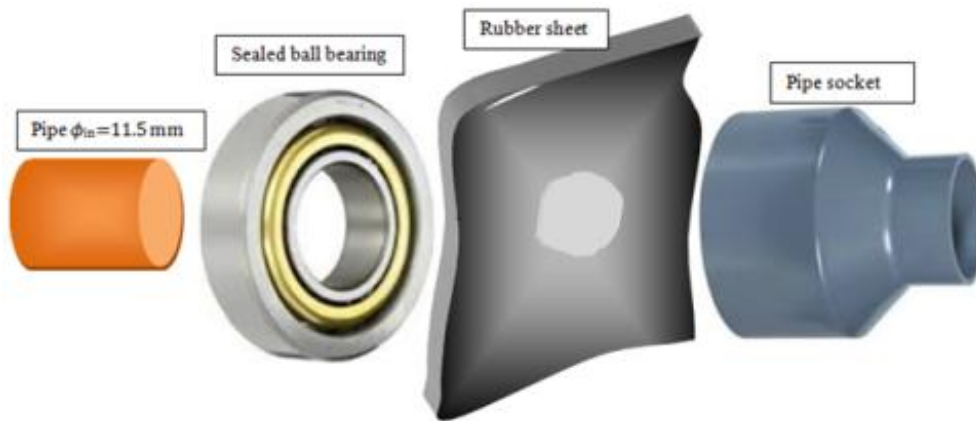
(a): mechanical rotary lip seal component arrangement
